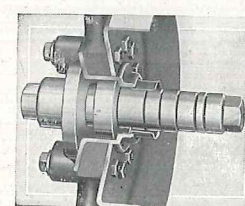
The Illustration Shows the Face Plate and Annular Adapter Method of Mounting Rear Wheels Fitted with Annular Ball Bearings
